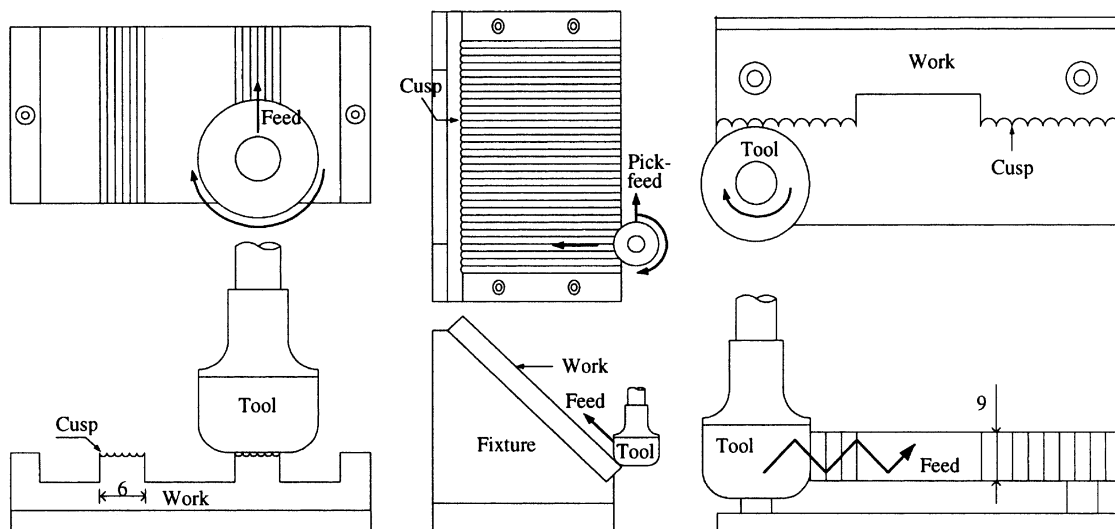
Setups for finishing capability tests with bottom (left), corner (center) and circumferential (right) surfaces of flexible abrasive tool.
